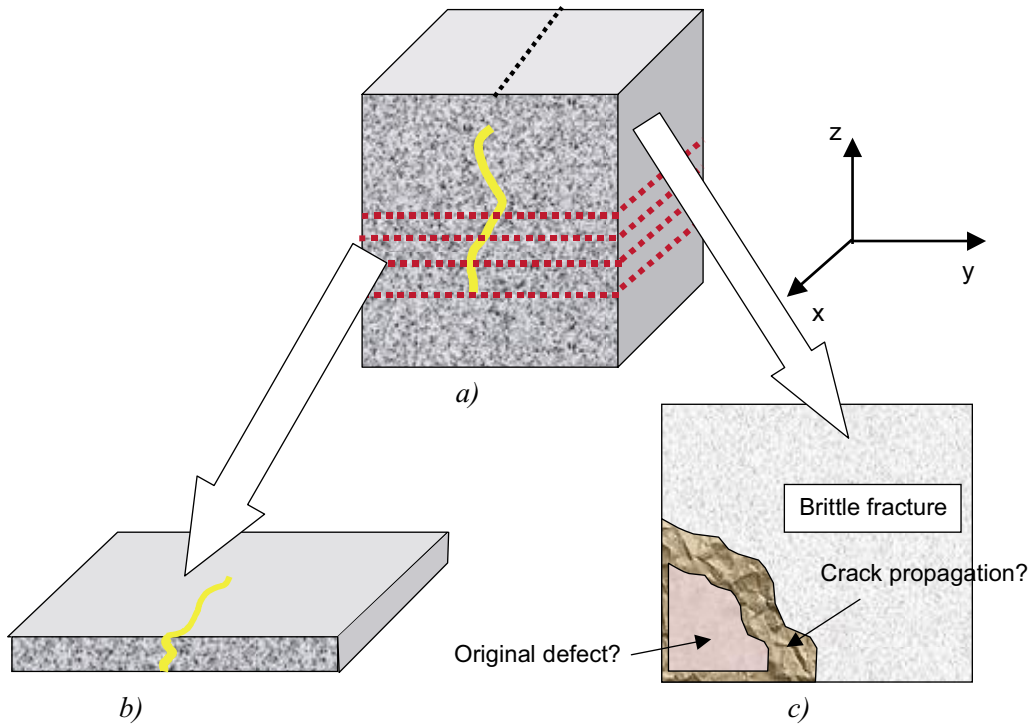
Illustration of cutting of cracked segment a) segment with crack for investigation b) thin slices prepared from lower part of for metallographic investigation c) upper part broken open for fractography.
